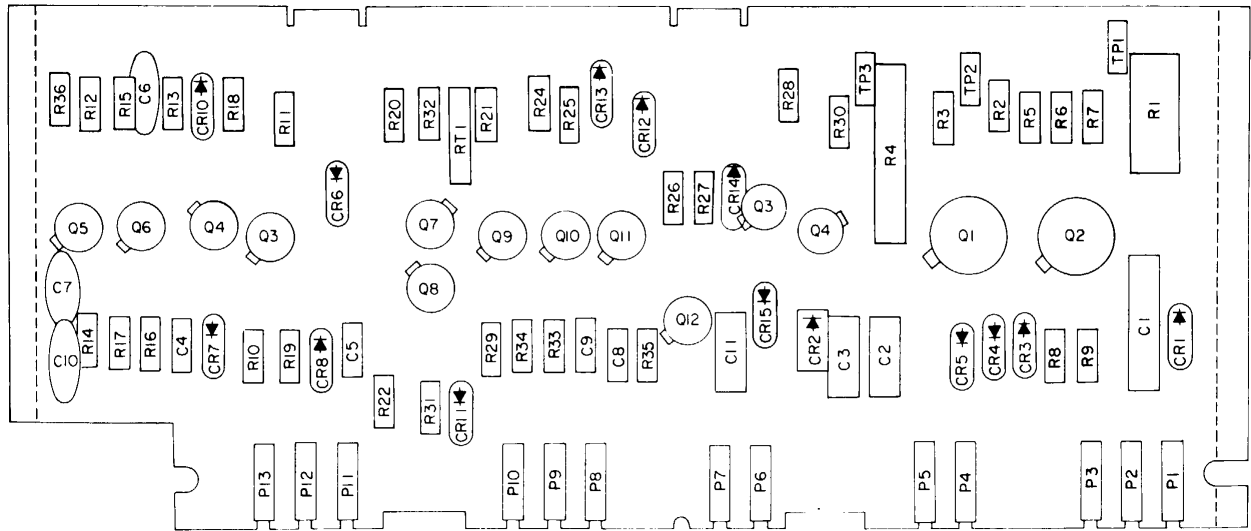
Power Supply and Reply Evaluator Assembly (01A233757-21-11) (A3), Component Locations
